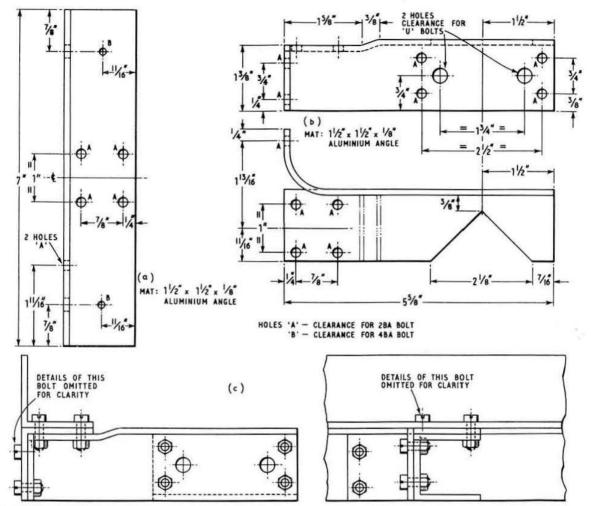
(a) The fixed bracket, of which two are required. One should be formed exactly according to the drawing, while the second bracket must be folded in the opposite direction. (b) Plan and side views of the mast support angle. (c) Method of assembling the complete fixed bracket.
